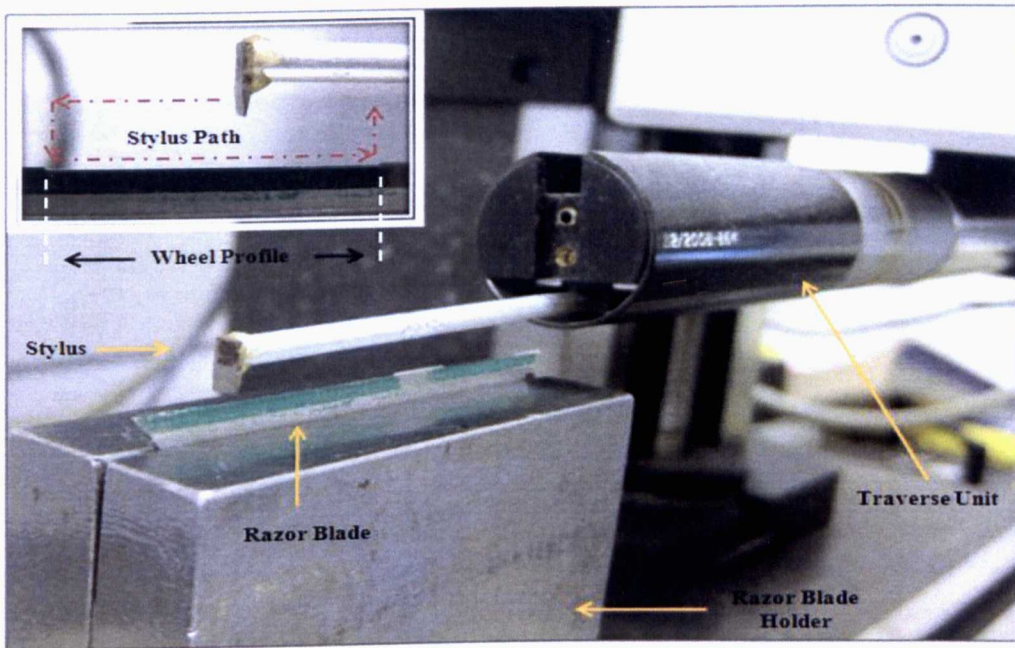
2: Wheel Wear Test Measurement Configuration.
